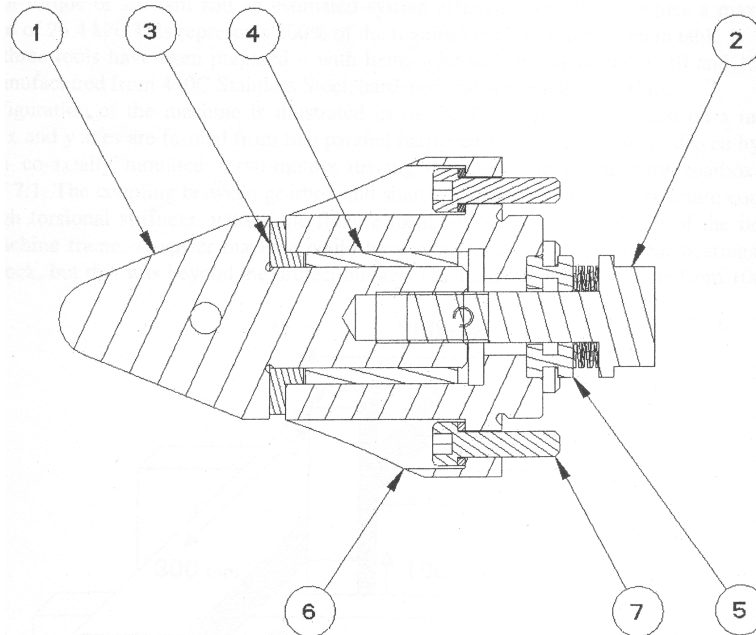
Allwood's tool; 1. tool, 2. preload screw, 3. thrust bearings, 4. radial bearings, 5. additional thrust bearing for the preload force, 6. tool-holder and 7. clamping bolts [ALL05].
